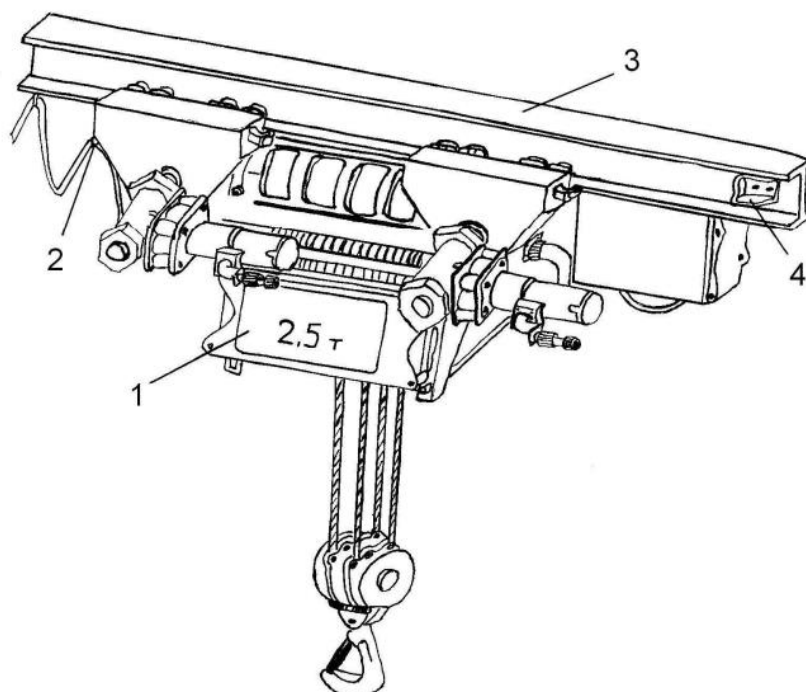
Electrical hoist: 1 – Winch; 2 – carriage with a cable; 3 – I-beam; 4 – stop.
